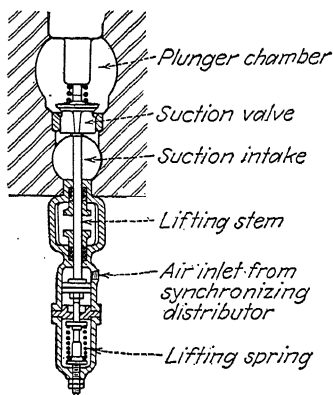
Enlarged section of valve lifting device shown at (3) in Fig. 10.
